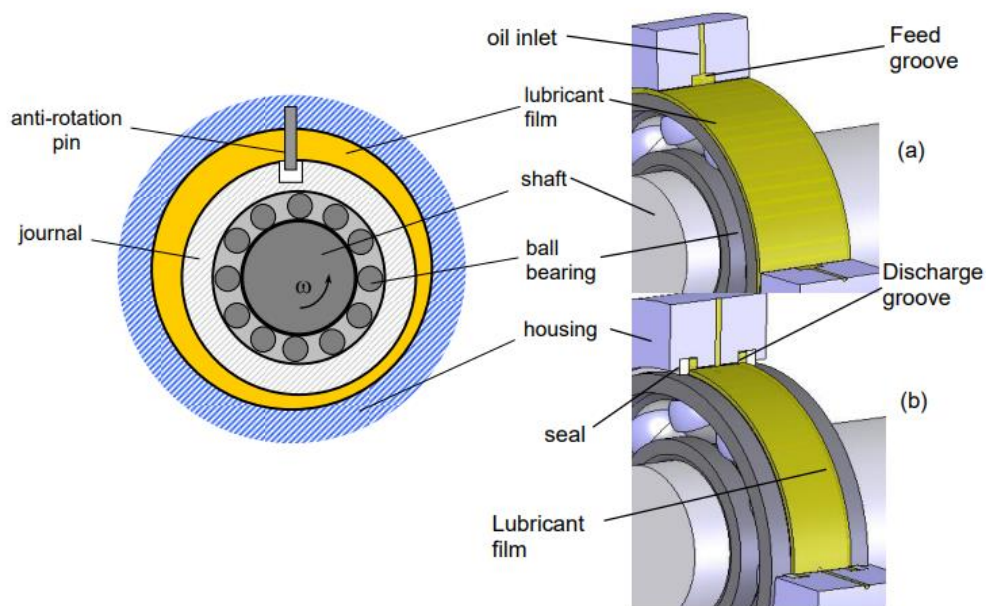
Squeeze Film Damper Configurations a) SFD with central feed groove
